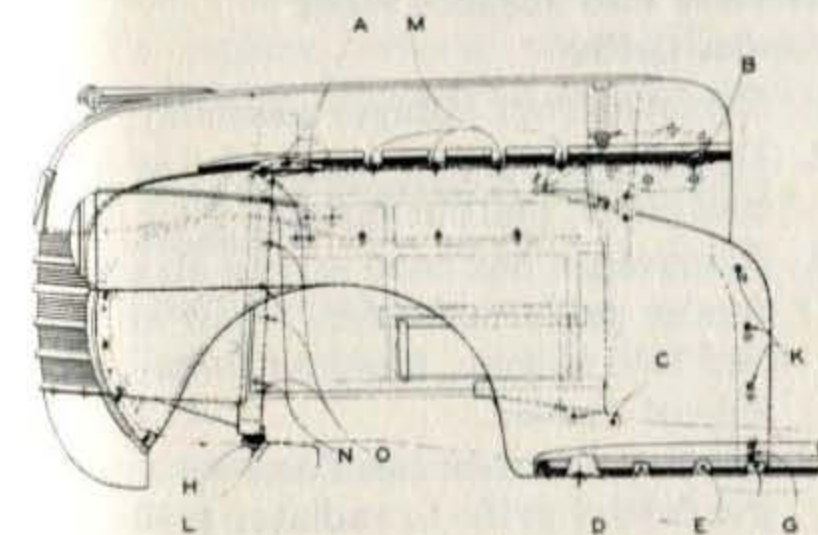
"F" and "G" Front-End Sheet Metal Layout
